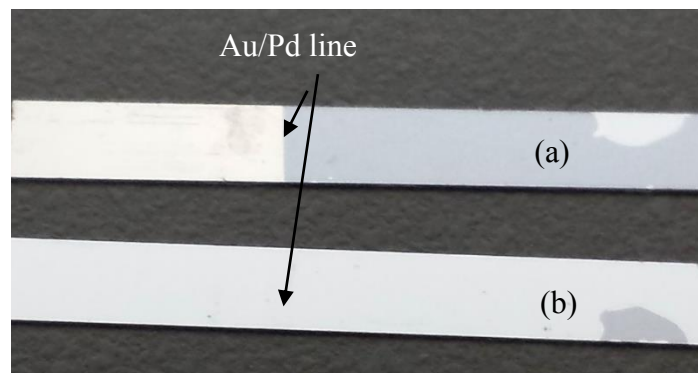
Fracture surfaces (a) lower adherend (b) upper adherend
